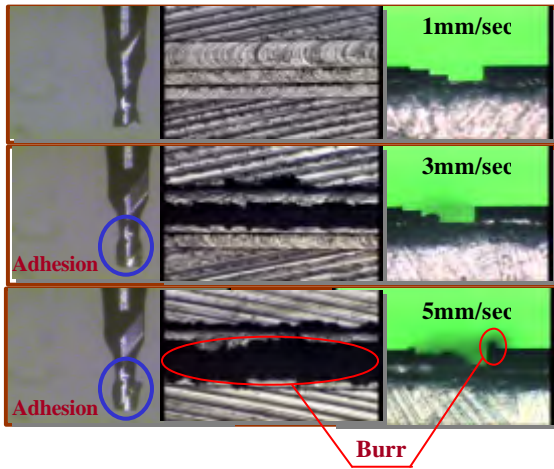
(a) Machining surface and burr shapes in accordance with machining conditions to 50,000rpm
